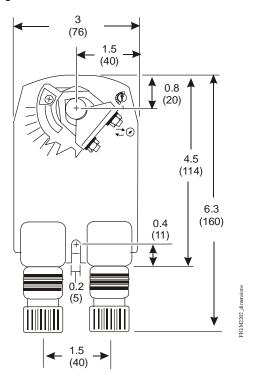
M2202-xxx-2 Series Actuators Mounting Dimensions, in. (mm)
